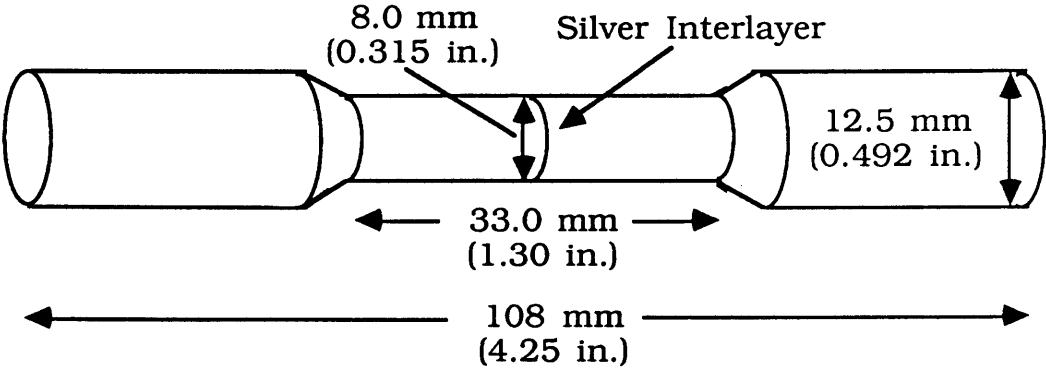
Schematic of bonding coupons showing the sample dimensions prior to bonding and prior to tensile testing.
